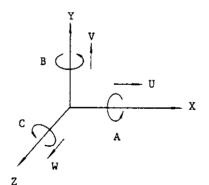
4Th Axis in Right-hand Coordinate System
